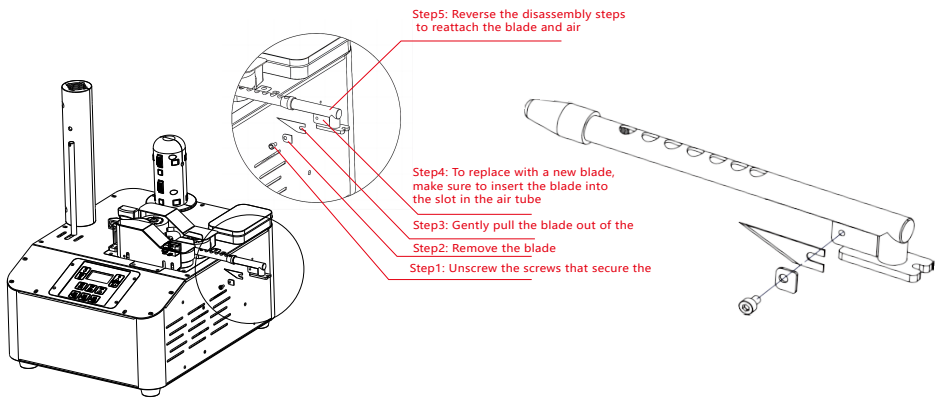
(Diagram of Air Tube and Blade Disassembly and Installation)
